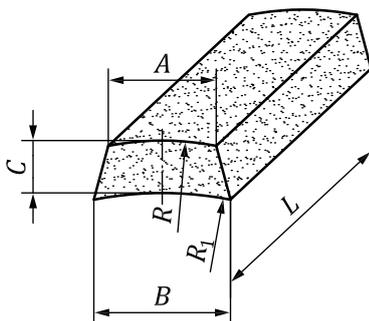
Grinding segment, trapezoidal shape, with outer and inner radius (Type 31E)
